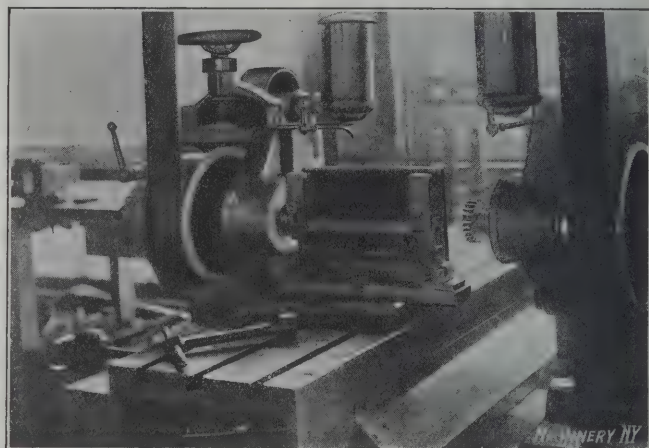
View showing Position of Milling Fixture with Reference to Cutter, when Stationary
